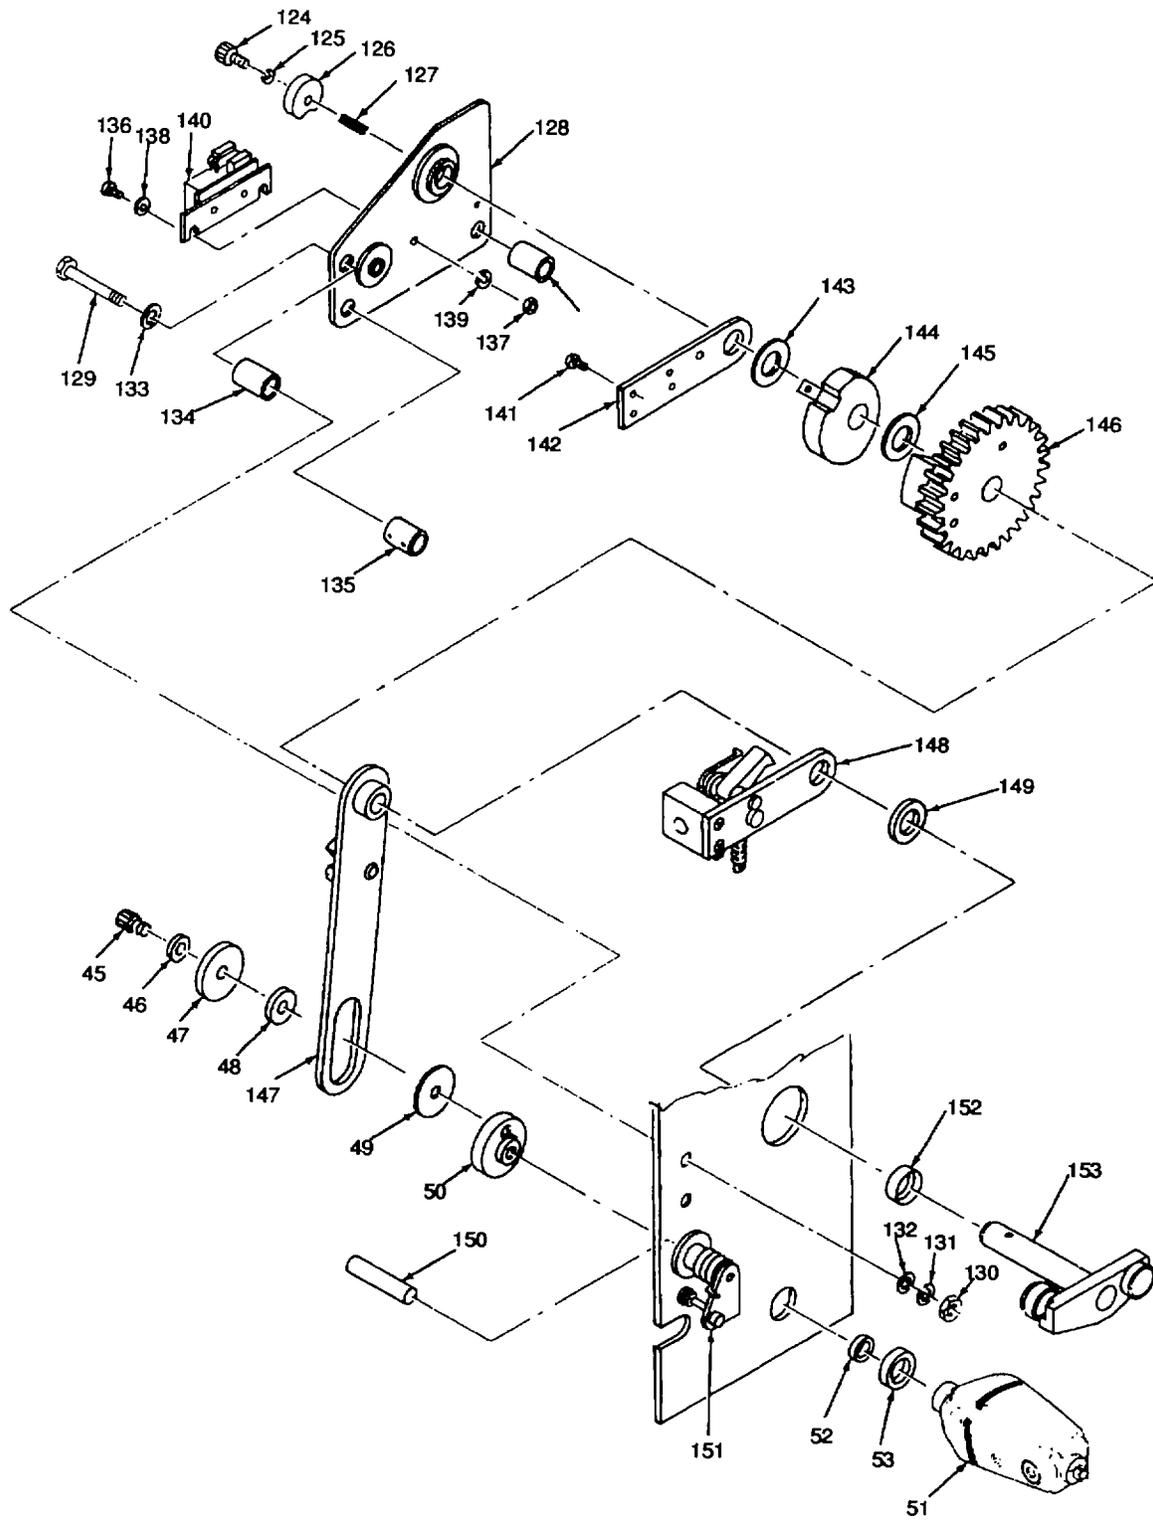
Load Circuit Breaker CB101, Exploded View (Sheet 4 of 6)
